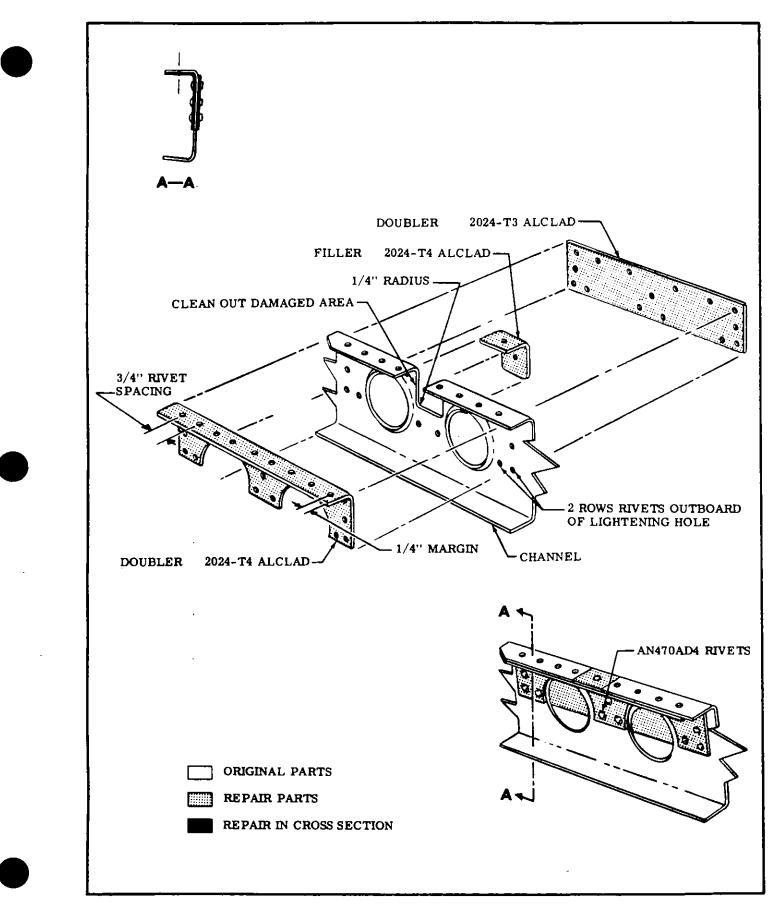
Stringer and Channel Repair (Sheet 4 of 4)
